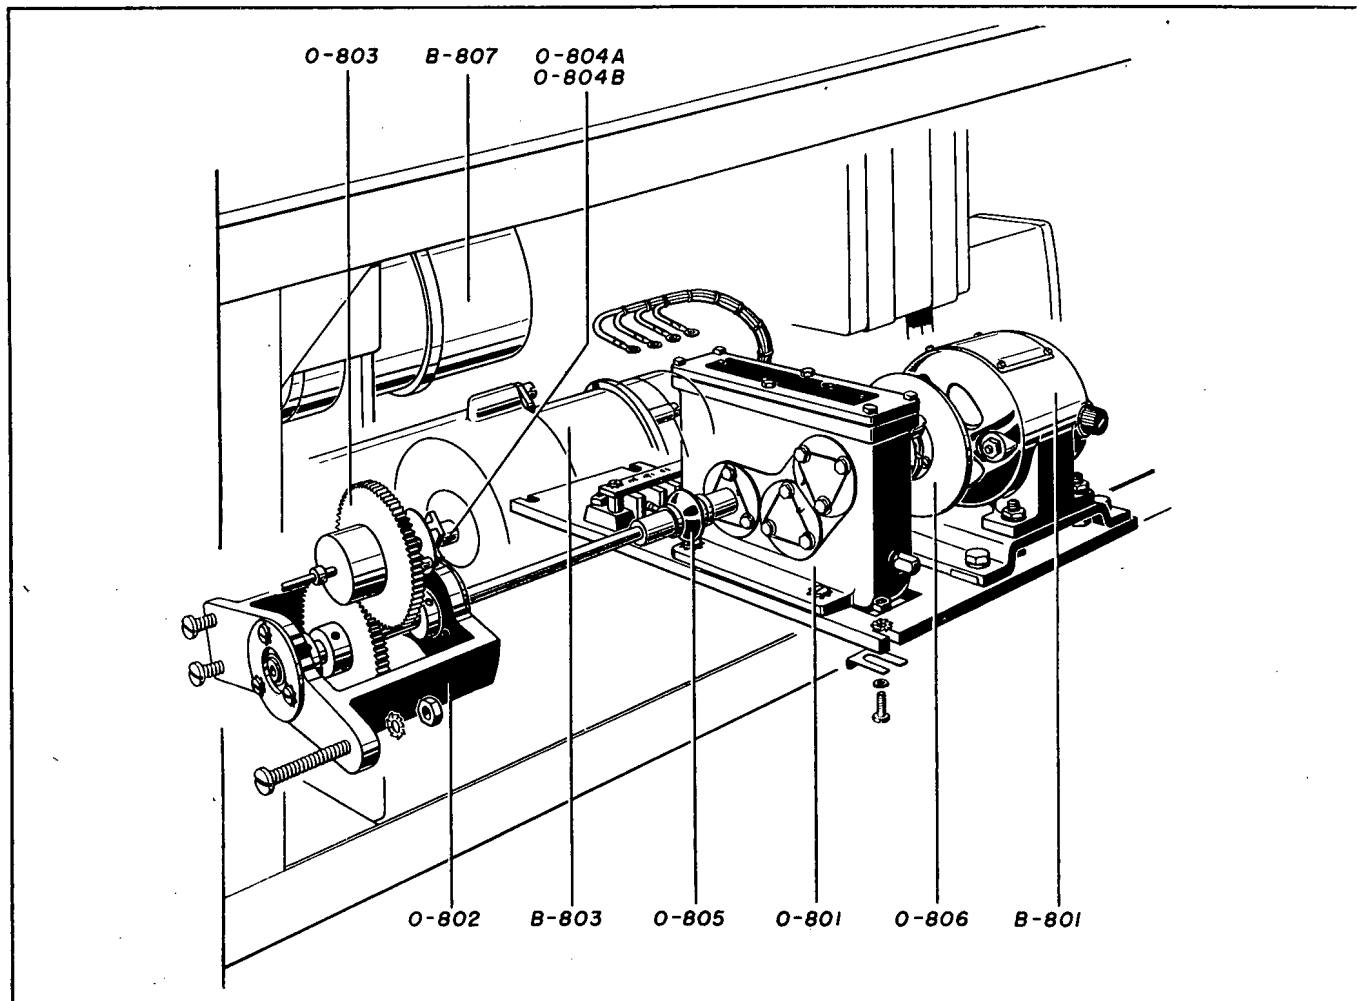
Removing Slewing Mechanism from Bearing Indicator
